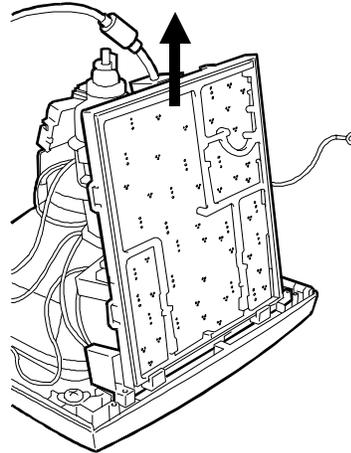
Removing the Main Board and Plastic Support from the CRT
